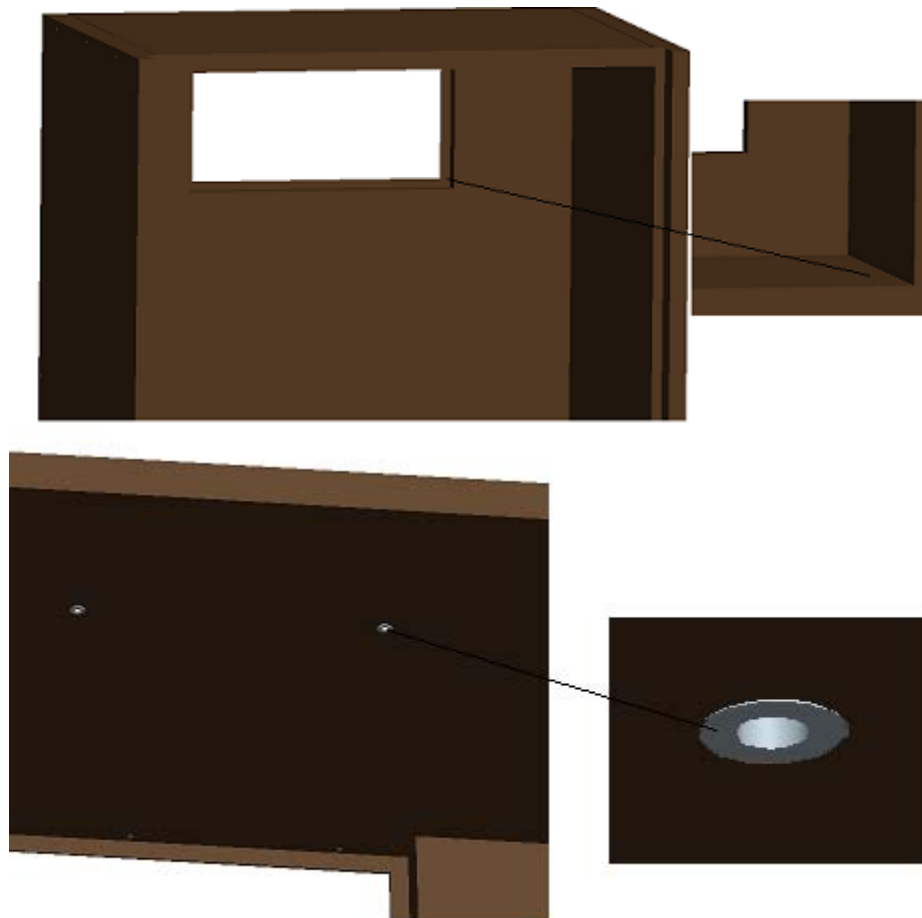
MOUNTING CUTOUT AND SCREW INSERT
